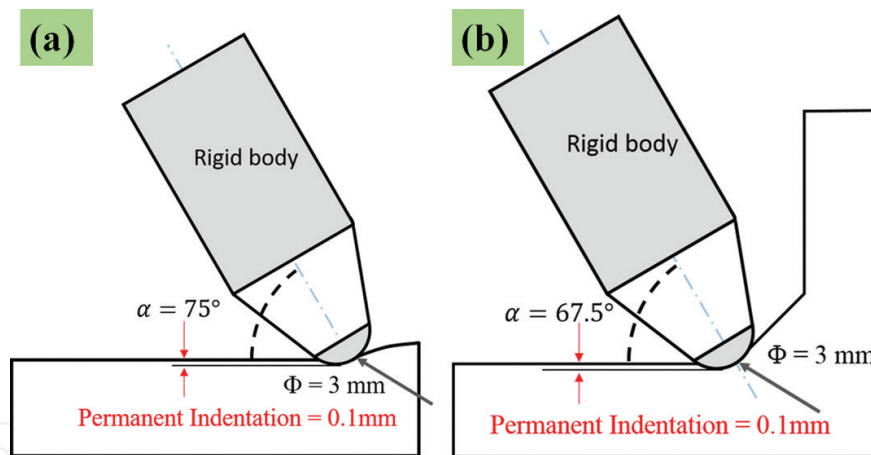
Pin tool position and indentation: (a) butt joint and (b) T-joint.
